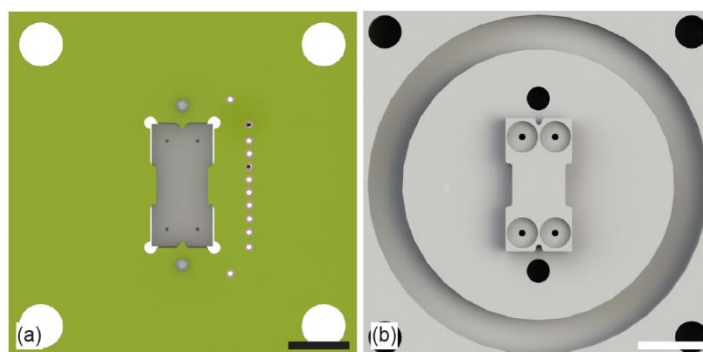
Solidworks view of the backside of the PCB (a) designed for easy assembly and accurate alignment with the microfluidic connector (b).
